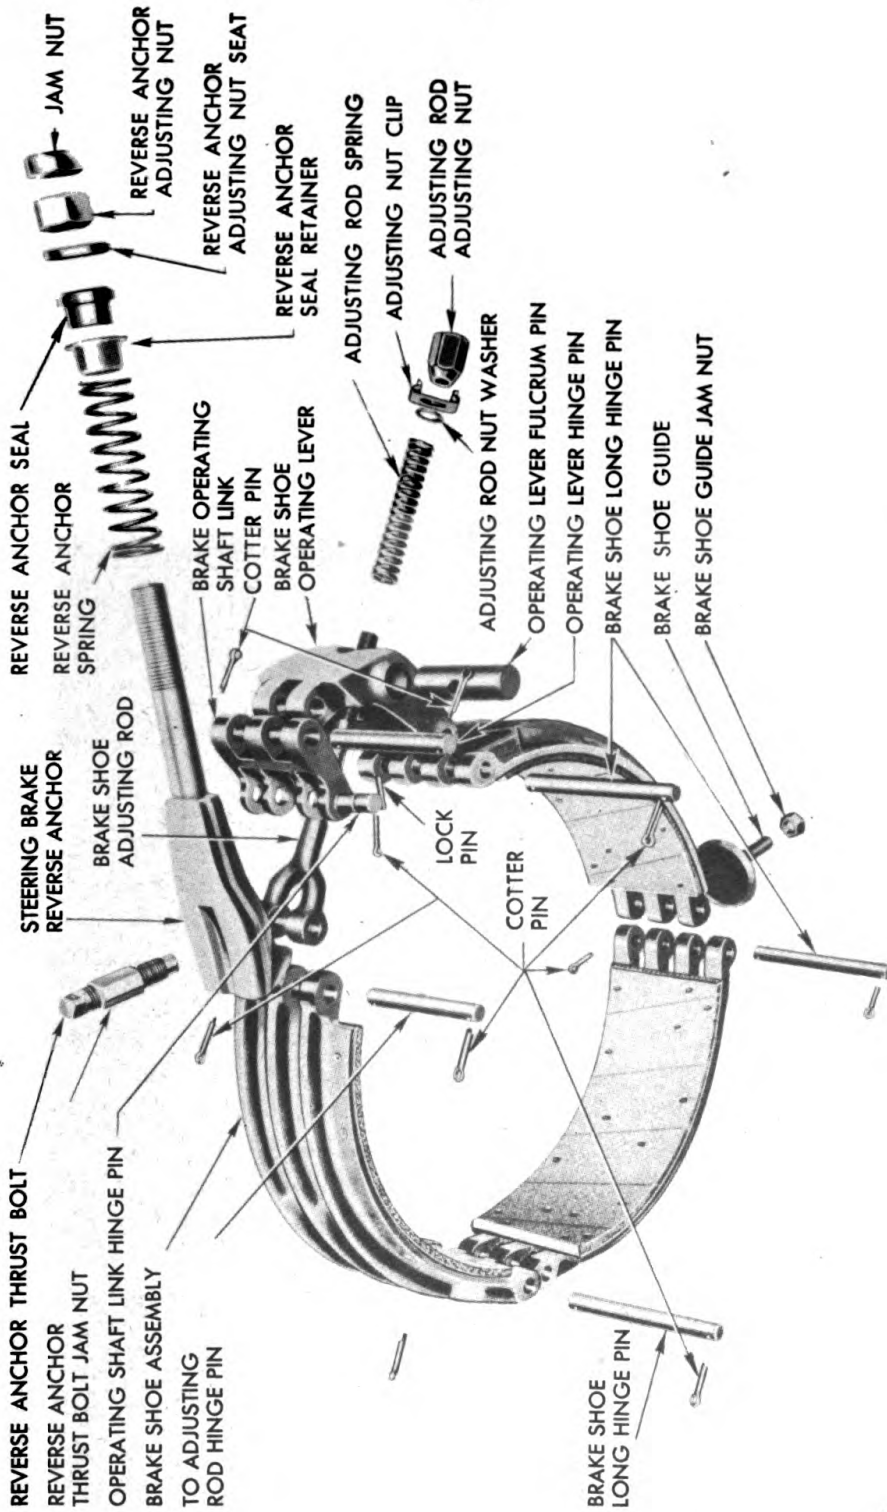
Steering Brake Shoe Mechanism — Disassembled
